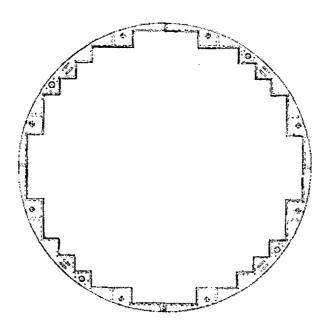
CS ASSEMBLY - PLAN VIEW (REFERENCE 7.9)
